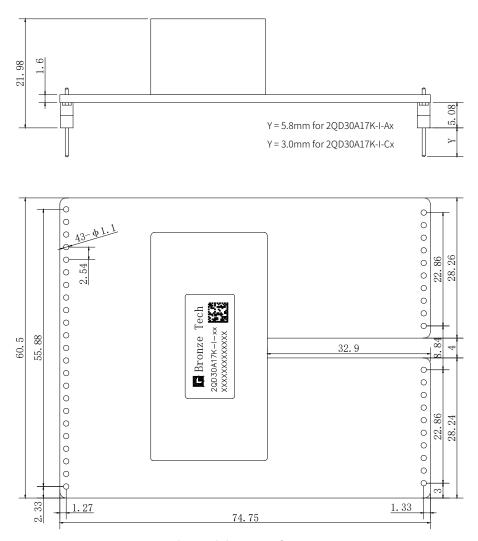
Mechanical drawing of 2QD30A17K-I-xx
